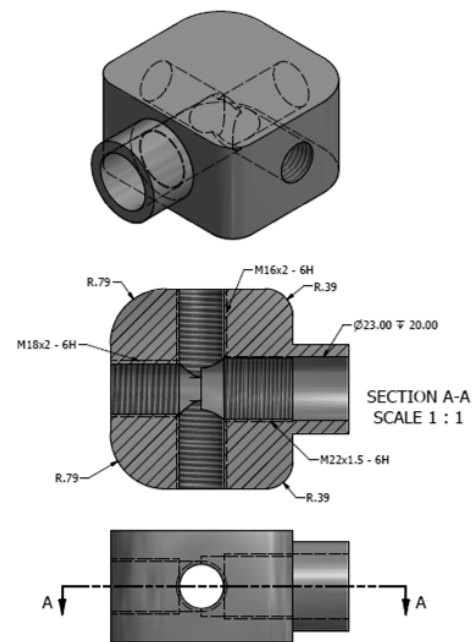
Sectional views of the nozzle body (all dimensions are in millimeters)
